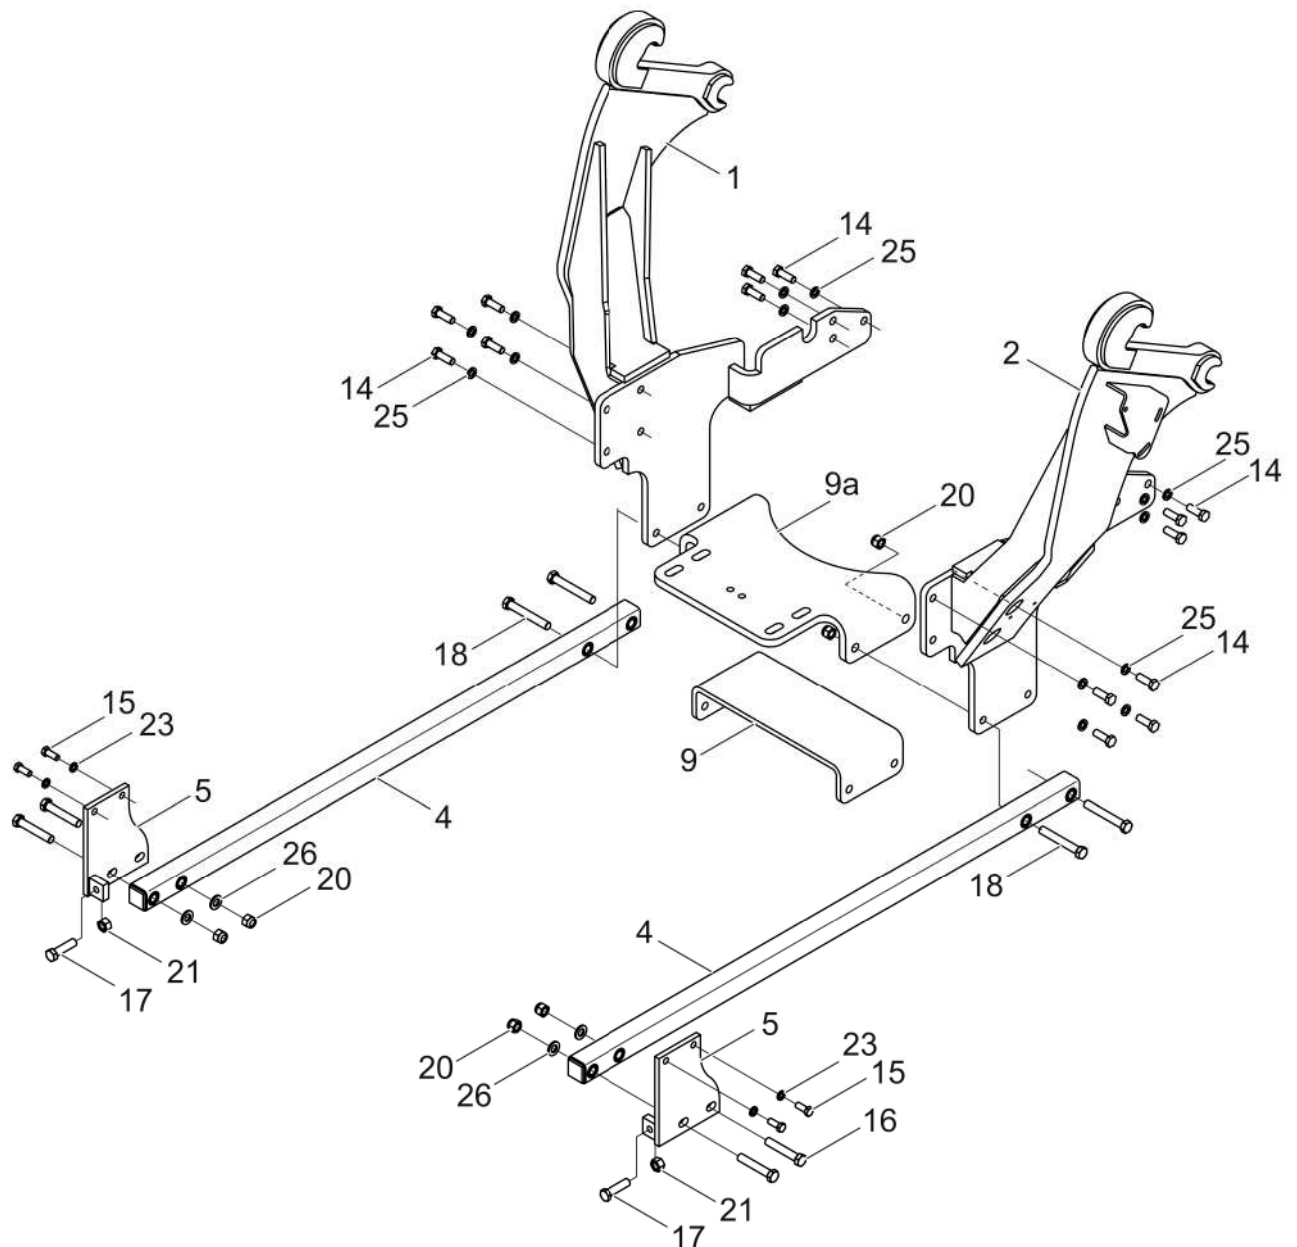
A Mounting support frame on KIOTI dk551C tractors
